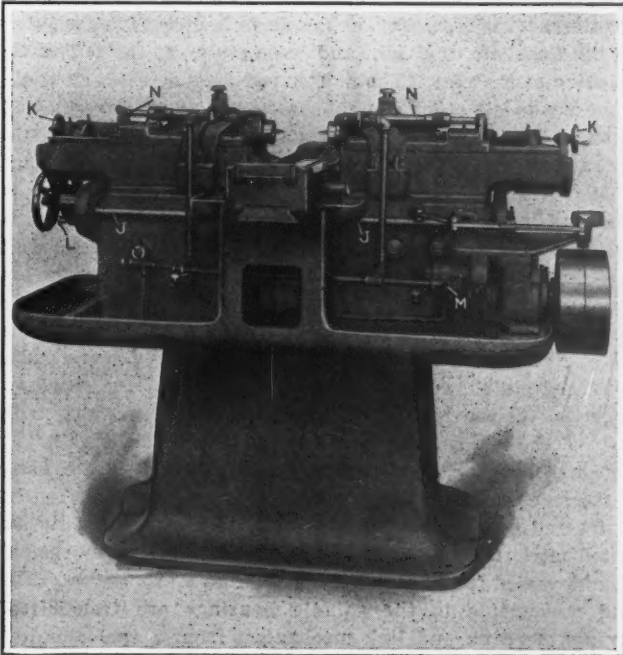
Arrangement of the Pump and Piping which delivers Coolant to the Work through the Spindles and Cutters
